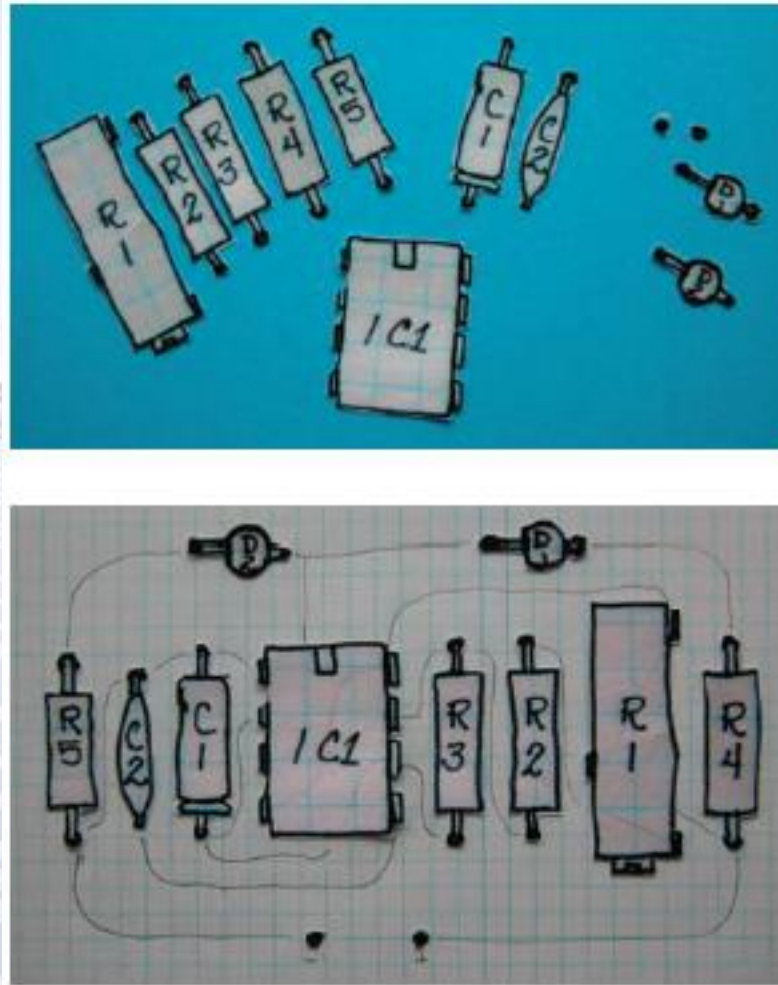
Using paper dolls for laying out a printed circuit board design.
